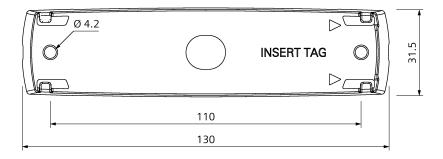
Dimension drawing spacer for SIMATIC RF621T
